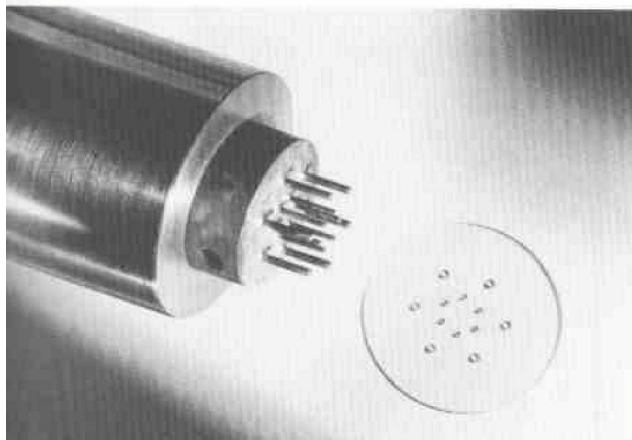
USM Gang drill tool for drilling 12 holes simultaneously [85].
